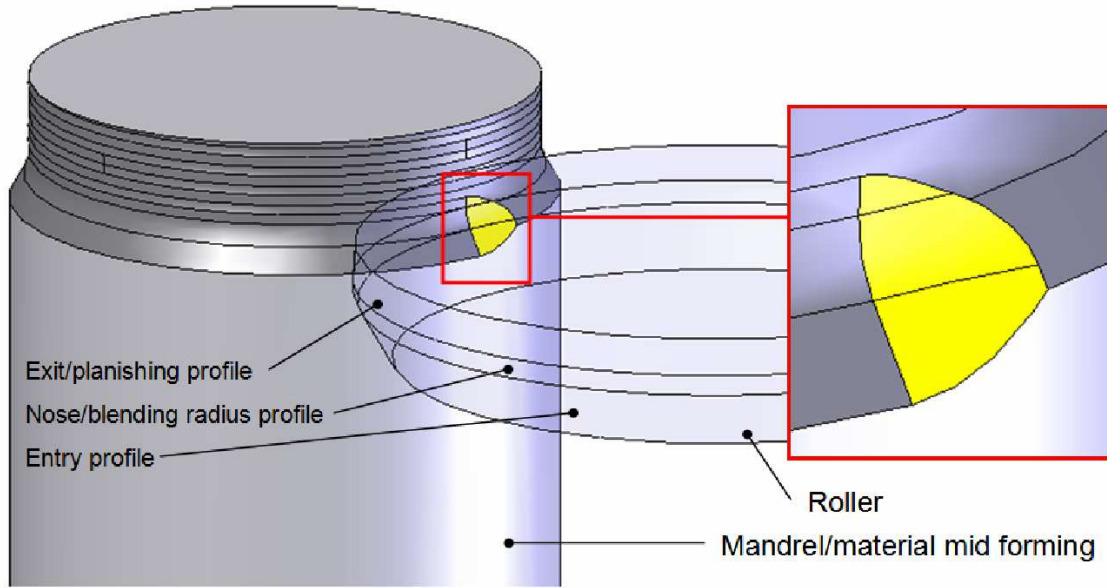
Single roller contact in flow forming showing the mandrel/workpiece and key roller profiles.
